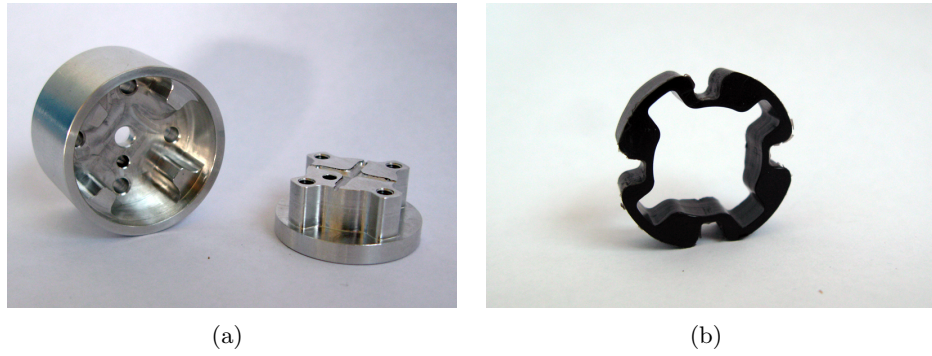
Mold for fabricating the intermediate part between the spindle and the chain wheel bracket. (a) Mold, (b) intermediate part.
